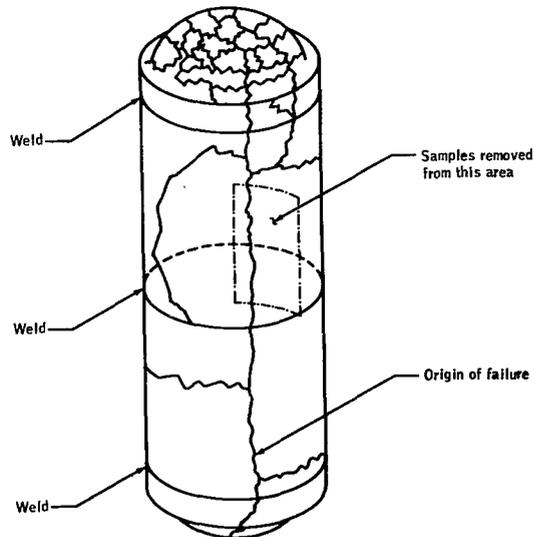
Spacecraft 017 failed tank showing failure pattern and location of samples used for specimens. (Not to scale.)
